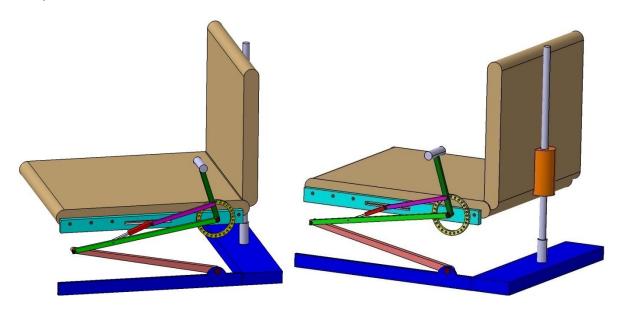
Isometric vies of CAD models (lifting mechanism is shown only on one side)
